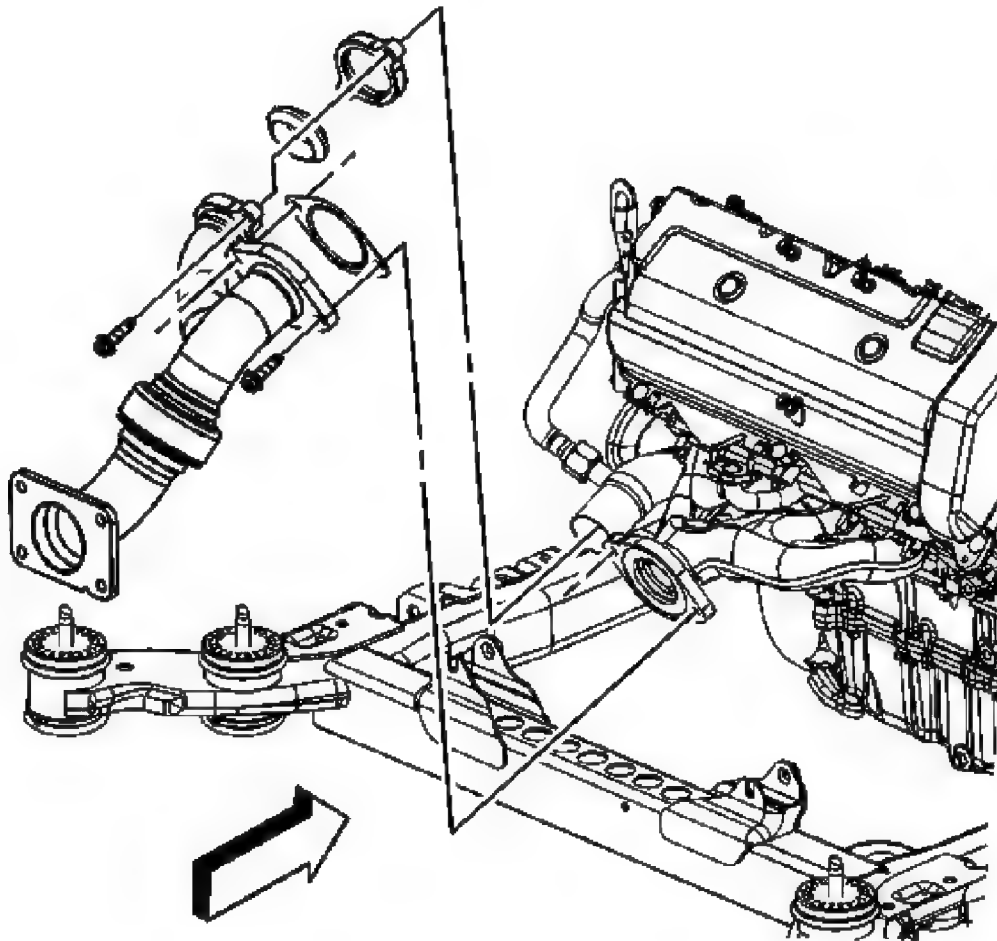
View Of Rear Exhaust Manifold Pipe & Attachments
